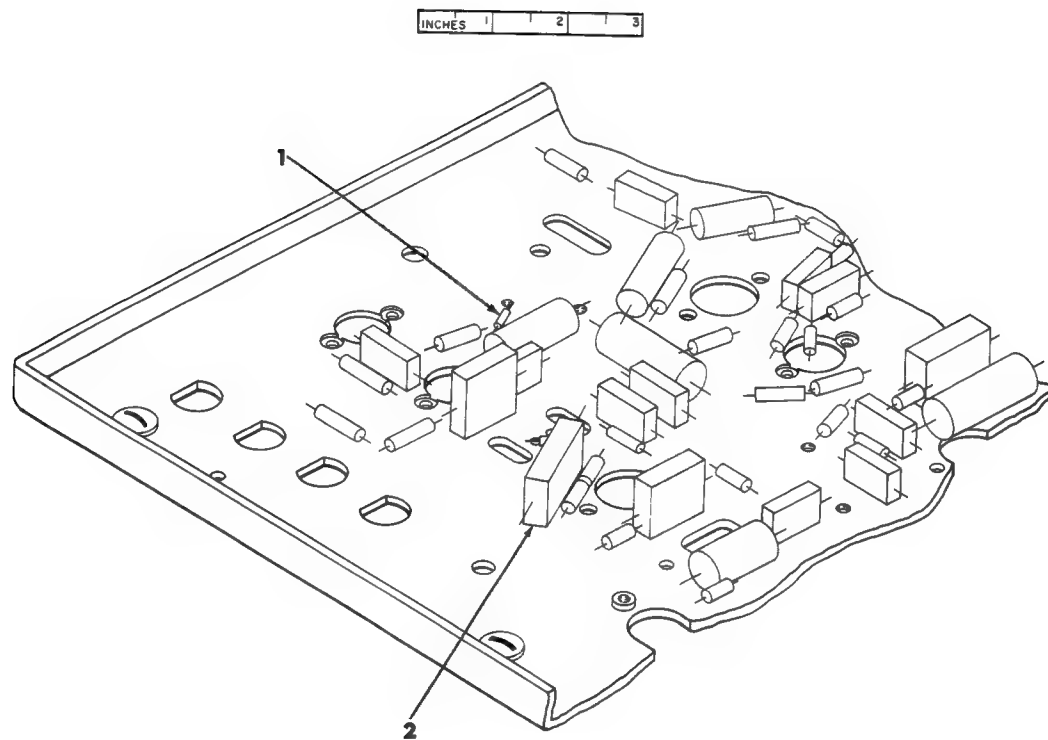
Coder, radar, guided missile (8159349)—partial exploded view
